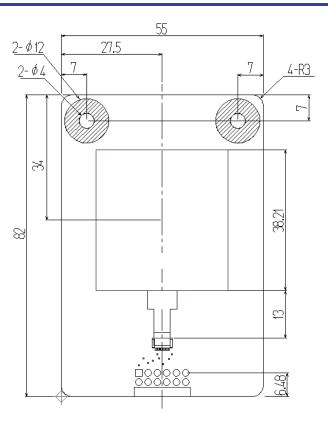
MIP-LCD Expansion Board Dimension (Unit: mm)
